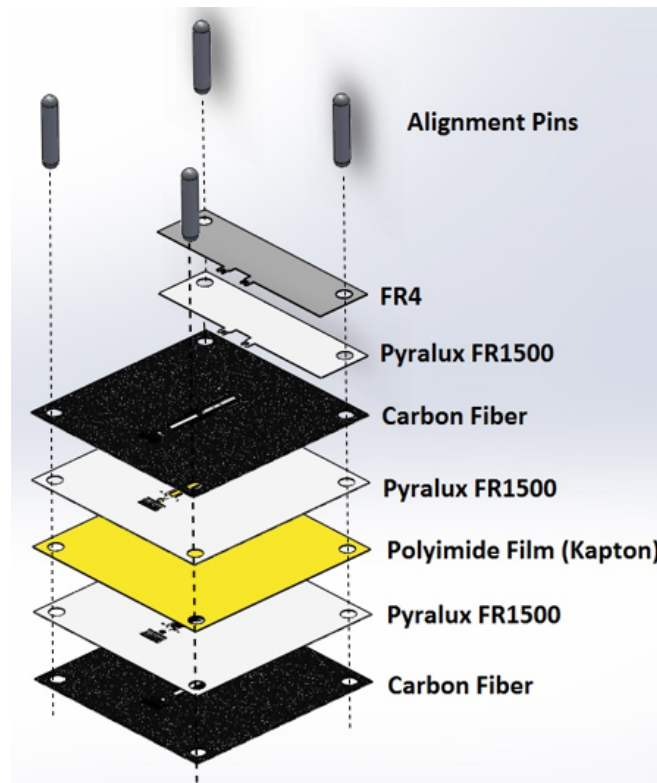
Exploded view of the different layers used in fabrication of an airframe before curing
